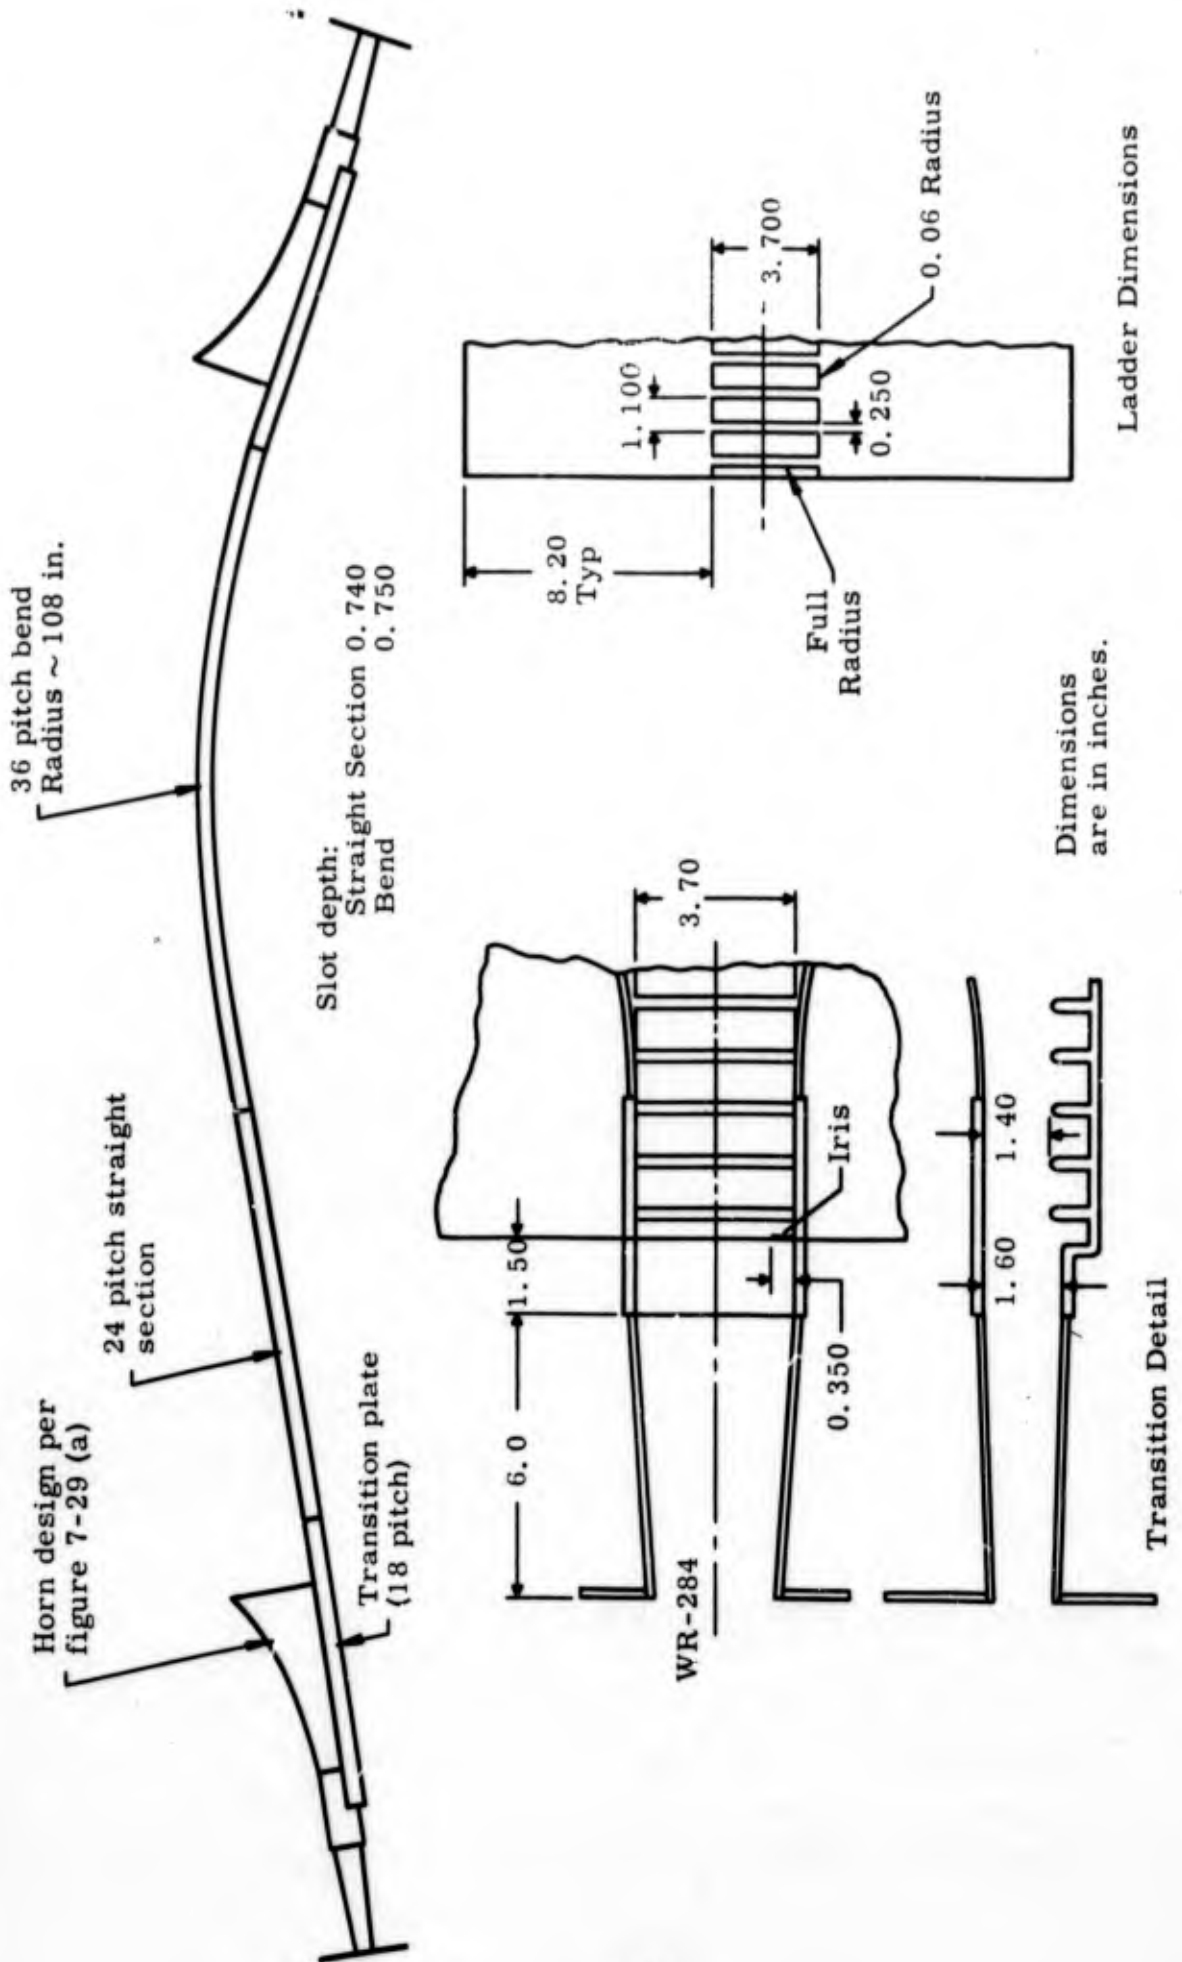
Dimensions of completed thick ladder filter assembly.
